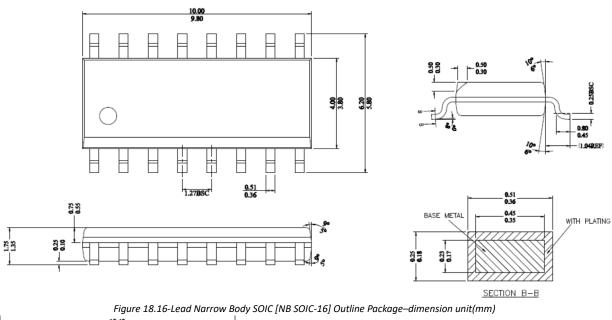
Lead Narrow Body SOIC [NB SOIC-16] Outline Package—dimension unit(mm)
